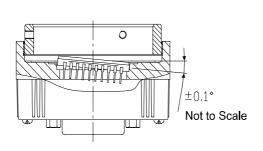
F-Mount Adapter Dimensions (in mm)
